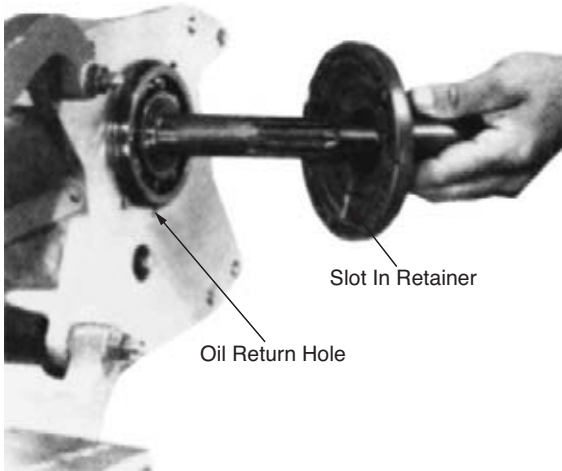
When the front bearing retainer is removed, it is a good practice to note the location of the oil return groove. (Courtesy of Ford Motor Company)
